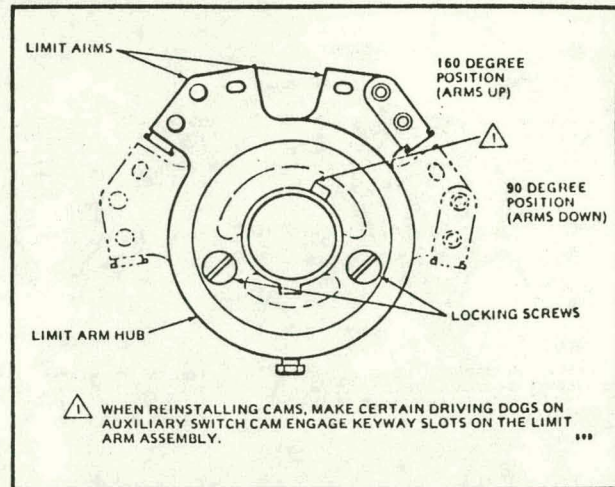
ADJUSTING LIMIT ARM HUB ASSEMBLY TO CHANGE THE STROKE OF THE MOTOR.
